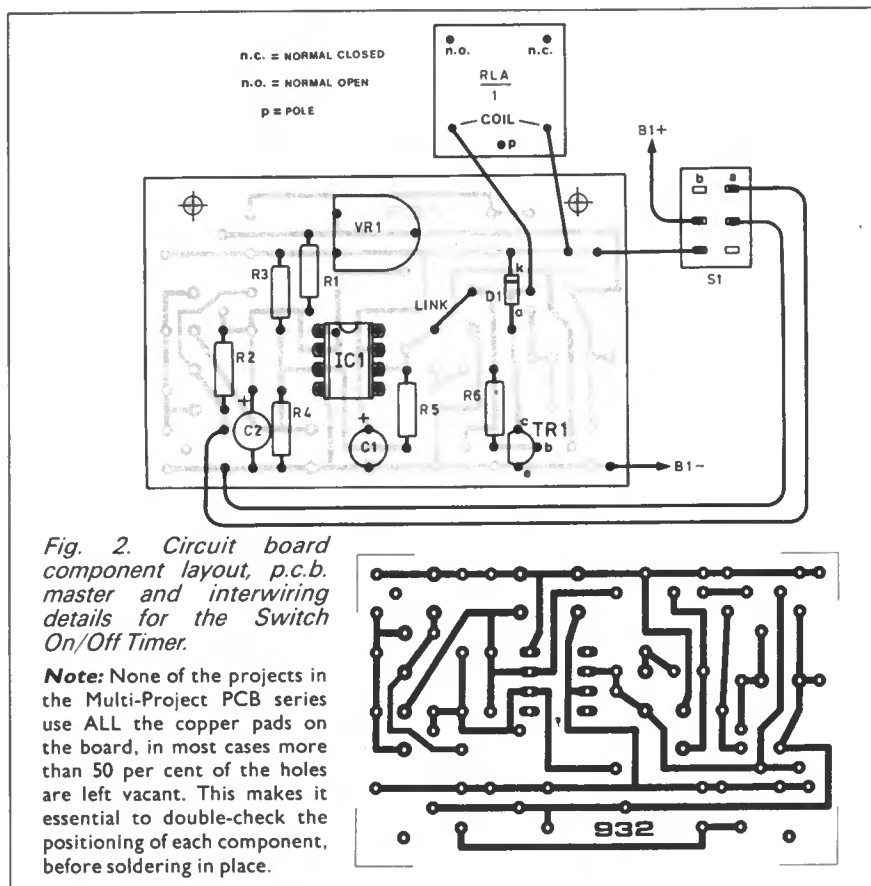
Circuit board component layout, p.c.b. master and interwiring details for the Switch On/Off Timer.
